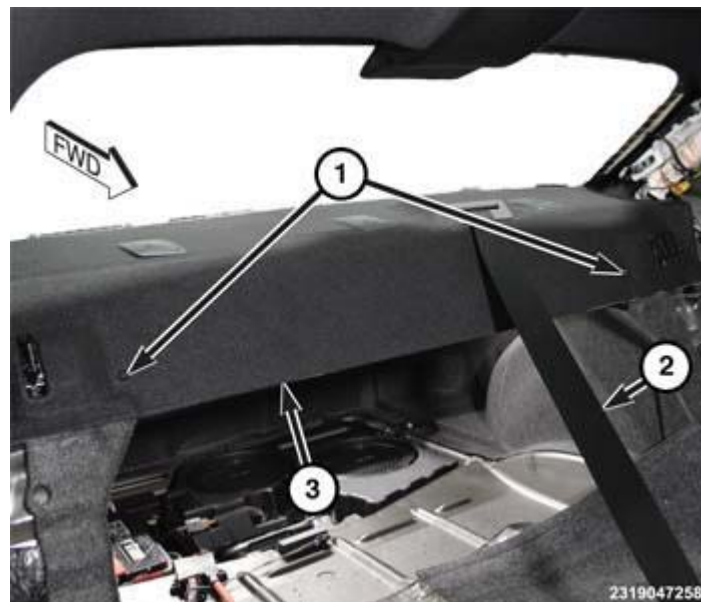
Push Fasteners, Rear Seat Belt & Rear Shelf Trim
